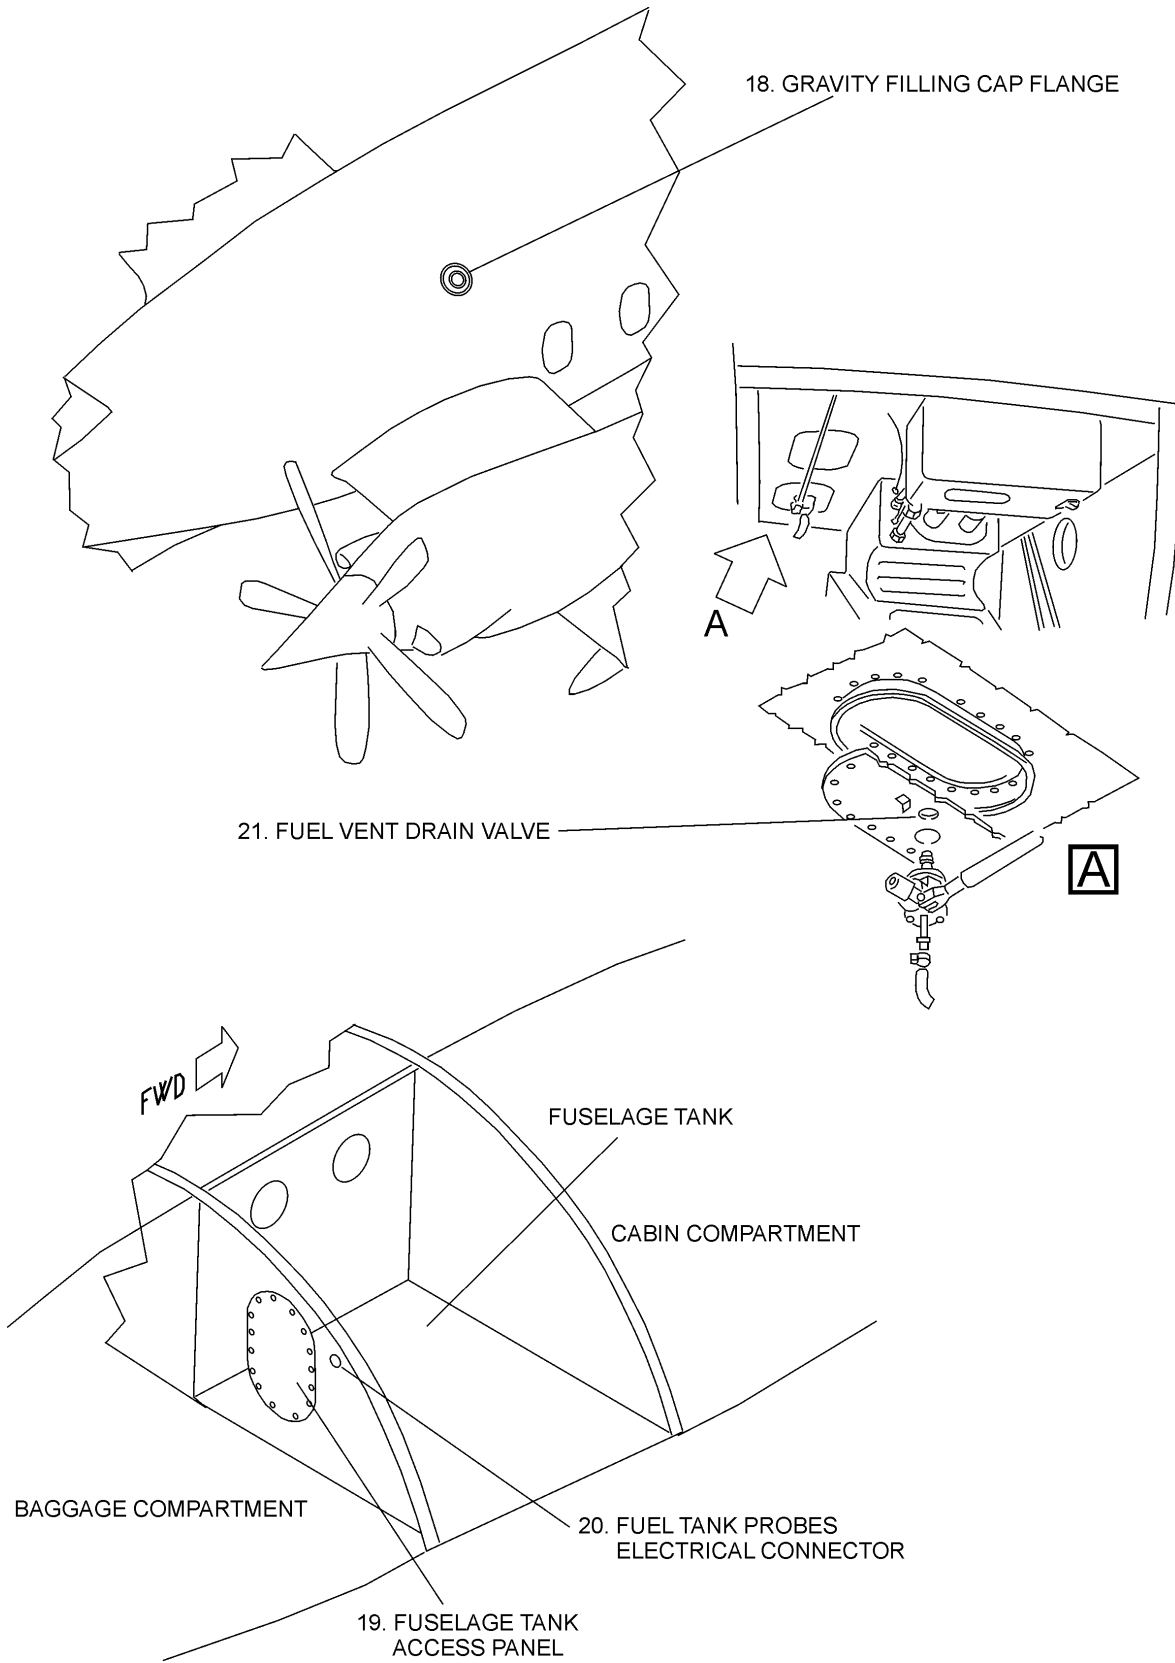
Fuel Tanks Access Panels and Components - Leakage Check (Sheet 4 of 6)
